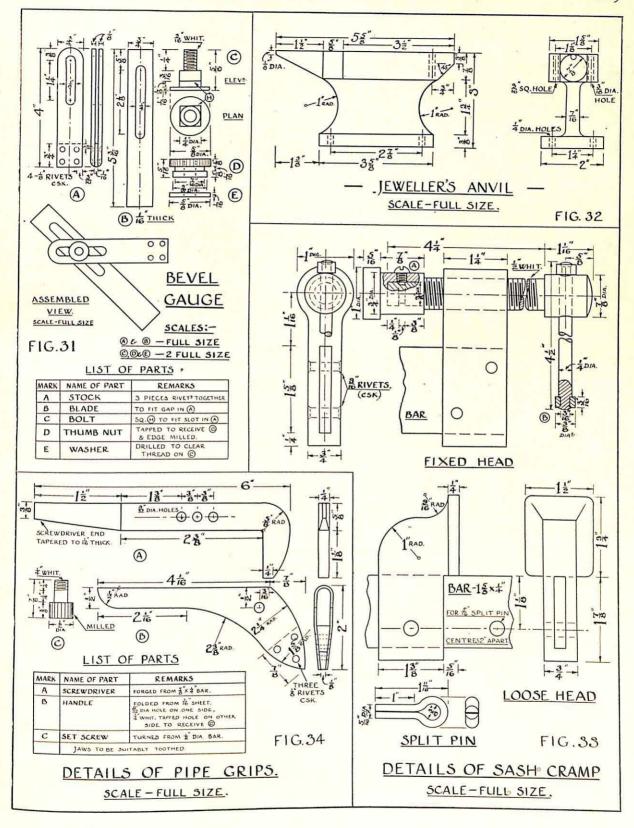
Jeweller's Anvil. The side elevation and a plan and various sections are suggested as further exercises.
